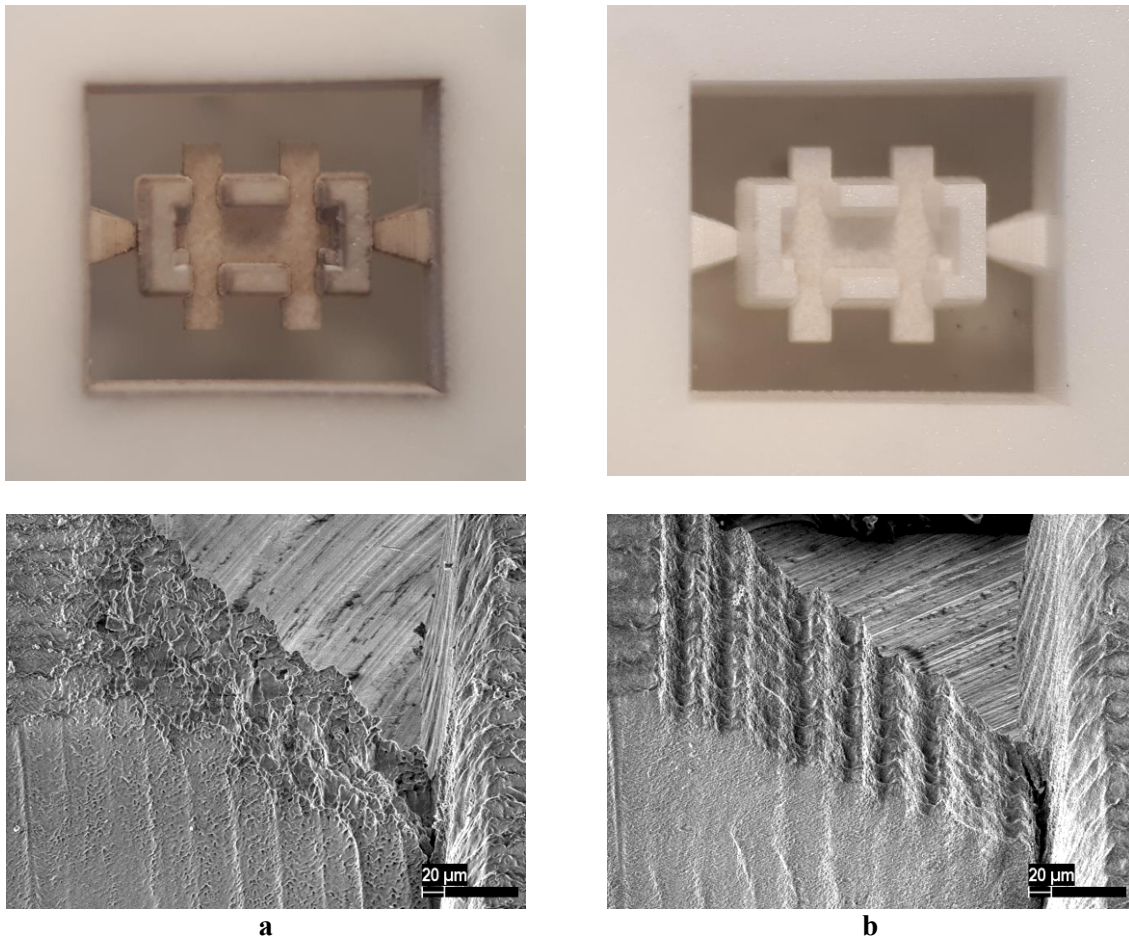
Optical and SEM image of fabricated bottom part of SMD package in form-factor SC89: (a) before cleaning and (b) after cleaning.
